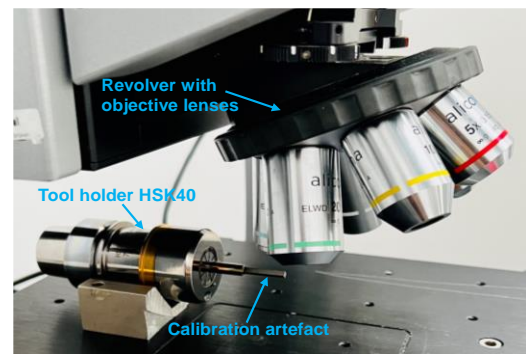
Experimental setup of edge radius measurement of the calibration artefact mounted on the tool holder HSK40 using Alicona Infinite Focus G4.
